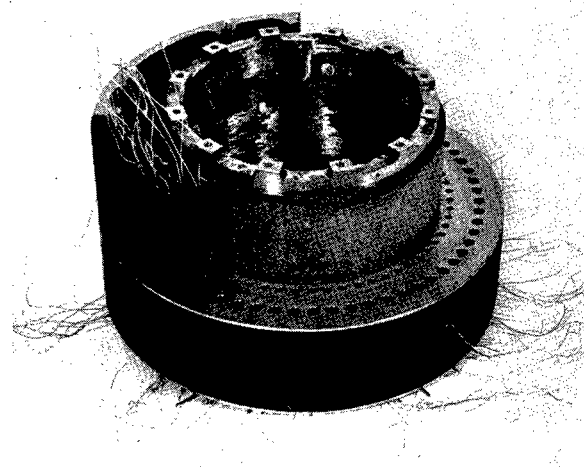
Assembly of second set of stacks on HP-8D transducer.
